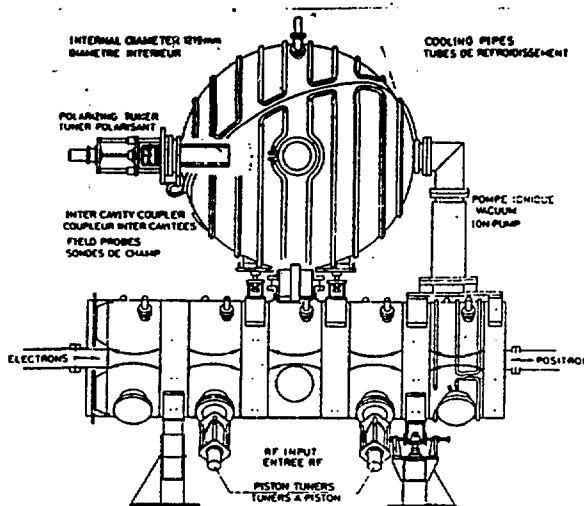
LEP storage cavity and accelerating cavity assembly.
